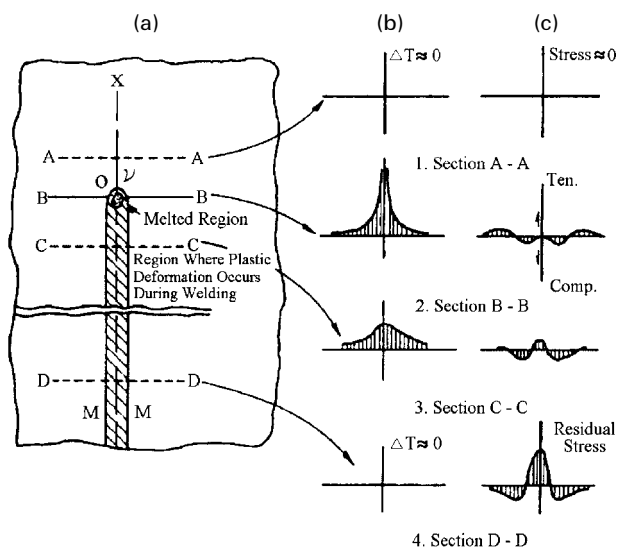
shows schematically the process by which residual stresses are induced in the weldment during the welding process. A bead on plate weld is being deposited along the x direction. The heat source is moving at a velocity v , and is presently located at the point O , as shown in Fig. 1a. The crosshatched area $M-M$ is the region where plastic deformation occurs during the welding process. The elliptical region near the origin O indicates the region where metal is melted. The region outside the crosshatched area experiences elastic deformation during the welding process.
